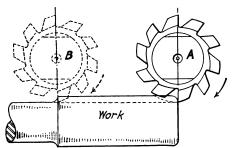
A cutting full depth of groove; Fig. 223). Remember B, end of cut, axis of cutter directly over also to set the autoshoulder.
